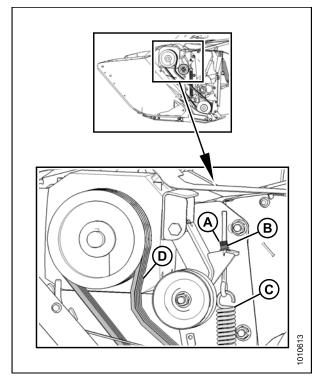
Drive Belt and Pulleys on Left Side of Conditioner
